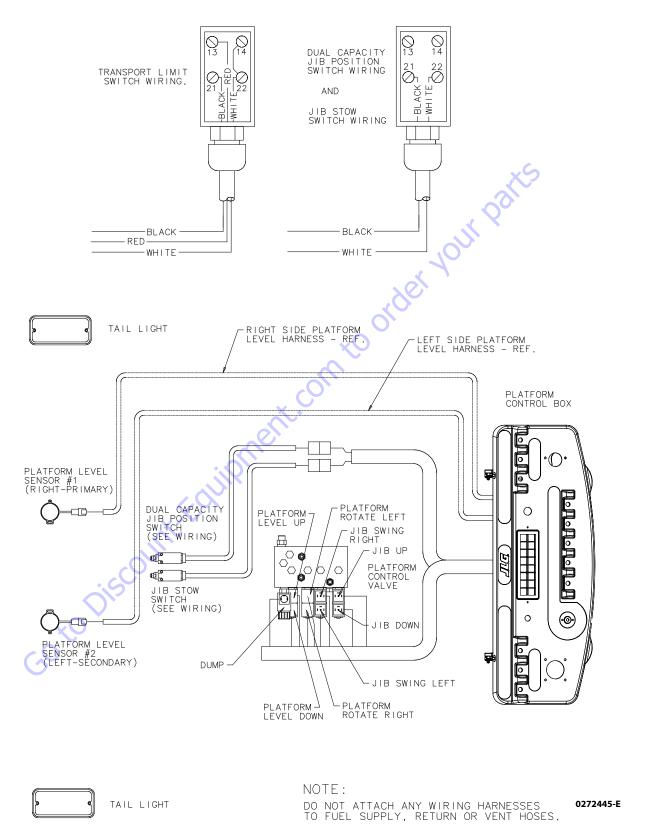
Turntable Electrical Components - Prior to S/N 87579 - Sheet 2 of 2
